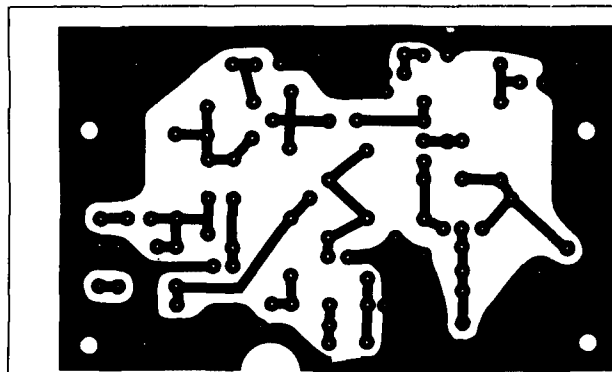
(B). VFO PCB TRACK LAYOUT AND (RIGHT) FIG 7 - THE COMPONENTS.
